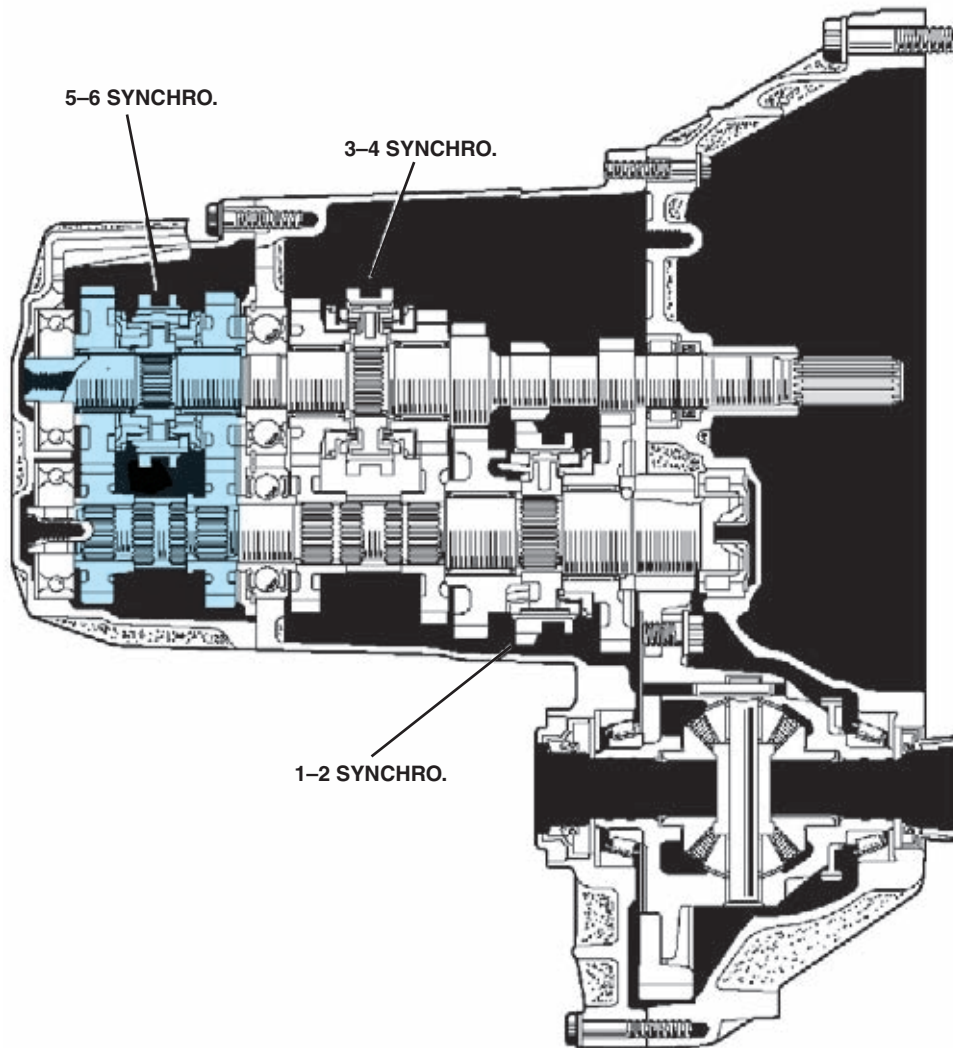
Six-speed transaxle with the fifth and sixth gears and synchronizer assembly in a side case. This unit is longer than the one shown in Figure 7-5. (Courtesy of Toyota Motor Sales USA, Inc.)
